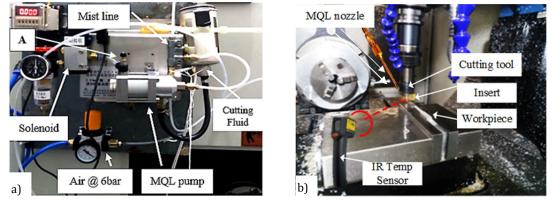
Experimental setup: a) MQL setup, b) CNC machining
